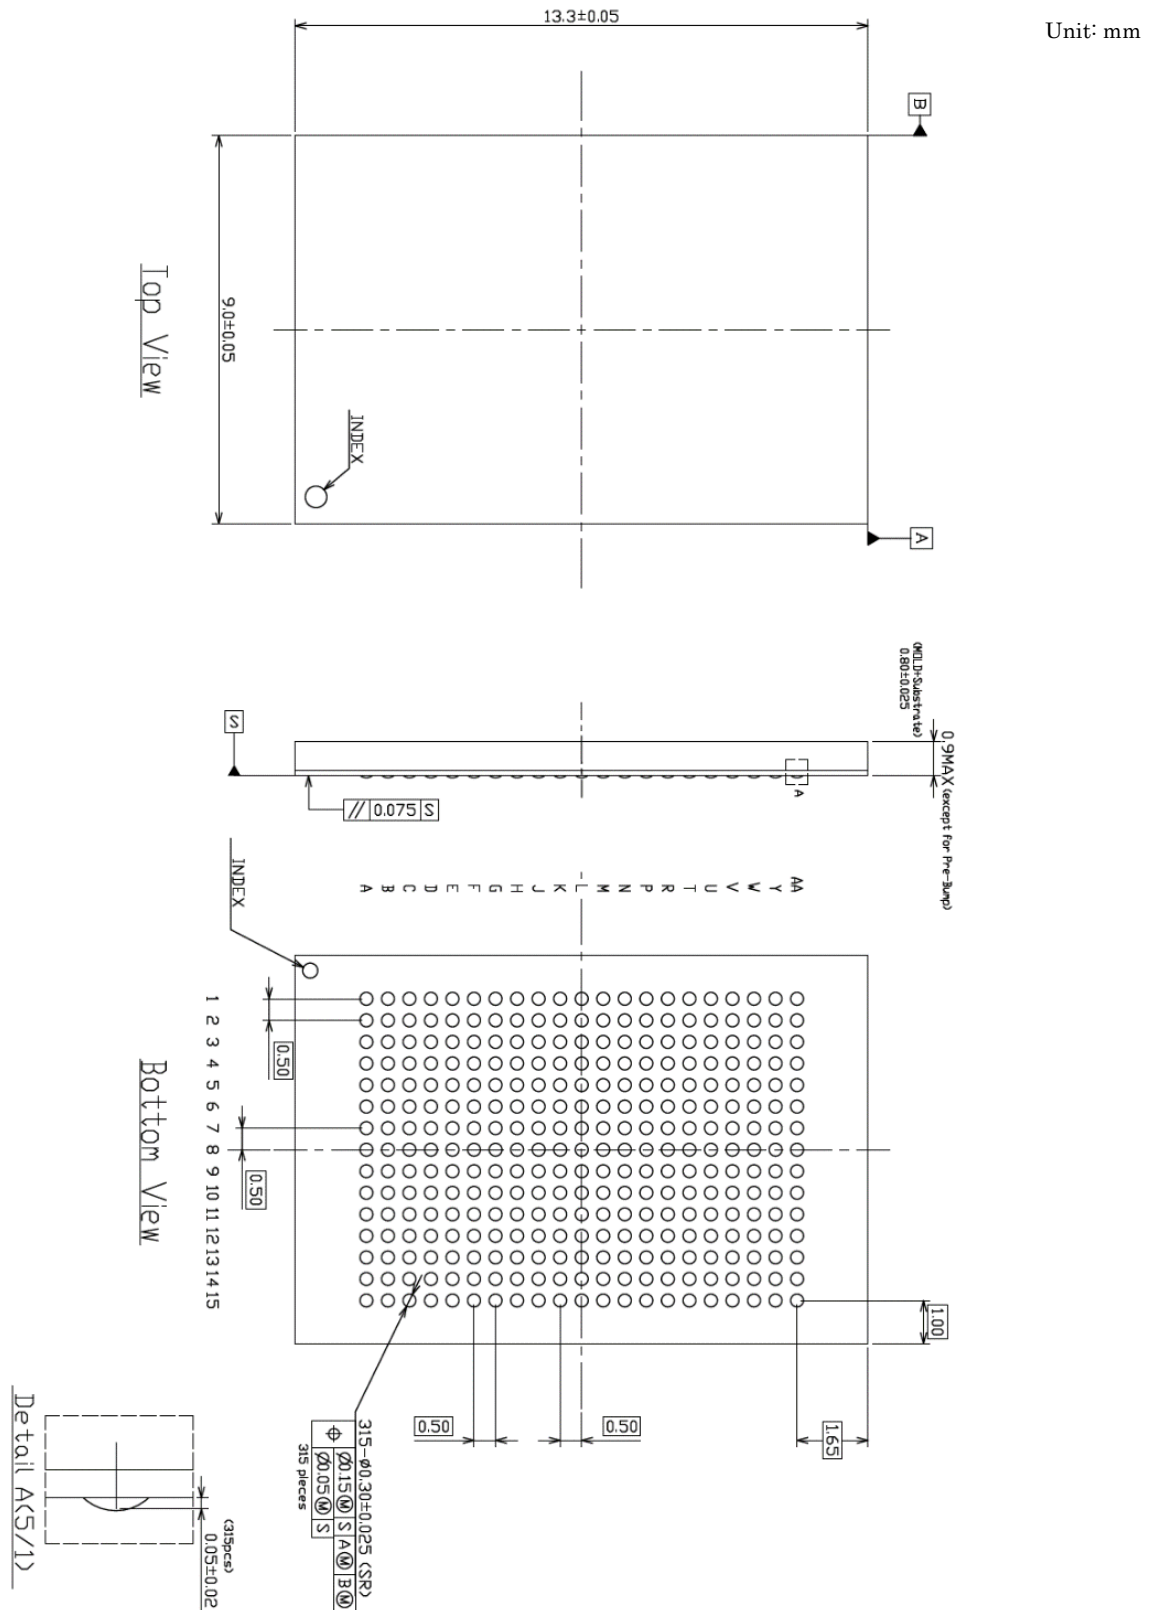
Package Dimension of P-VFLGA315-0914-0.50-001
